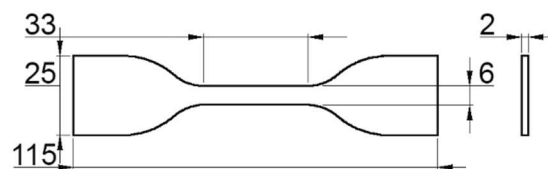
Type 1 tensile specimen, all dimensions in mm.
